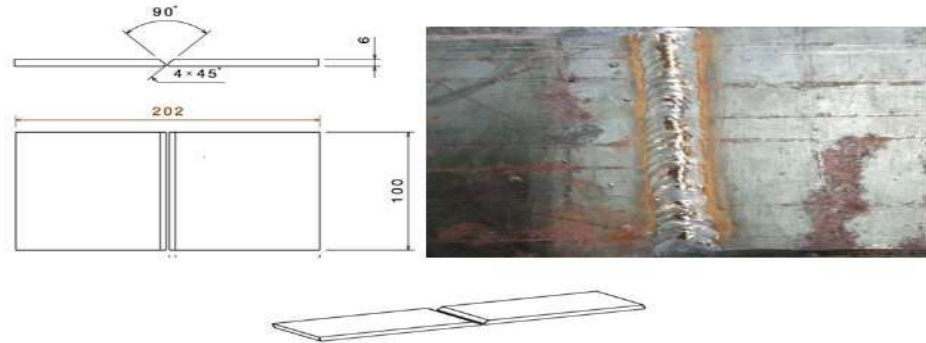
Photos of specimens during the welding experiment and Design of the welded workpiece in CATIA
